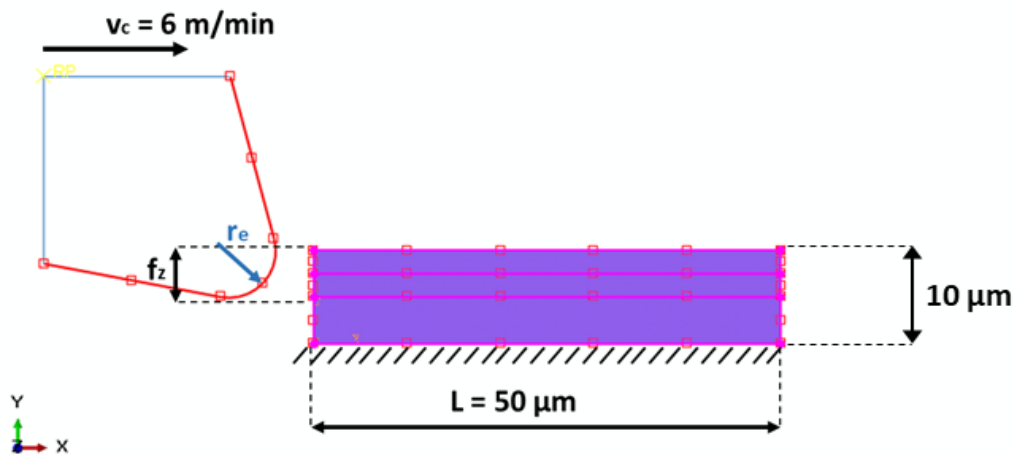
Modeling of the contact between the workpiece and the tool.
